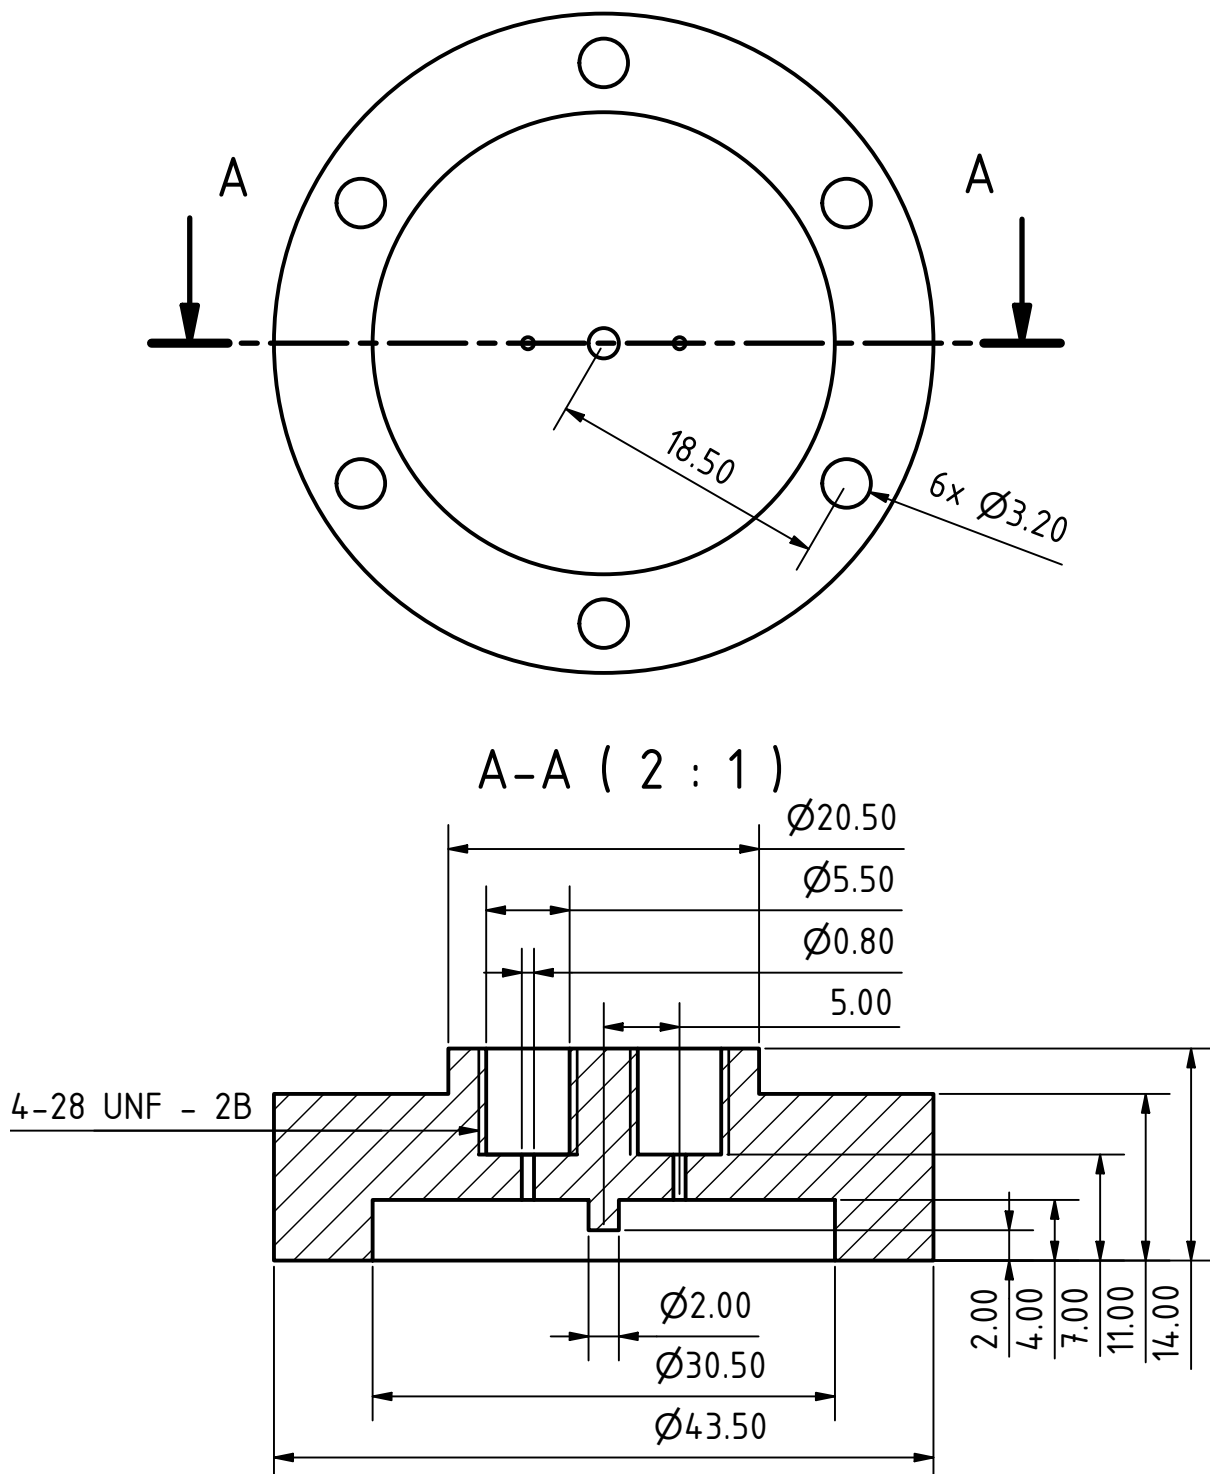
Technical drawing of the stator of the test valve: top view (top) and section view (bottom) with scale 2:1. All threads were cut after printing, all dimensions in mm.
